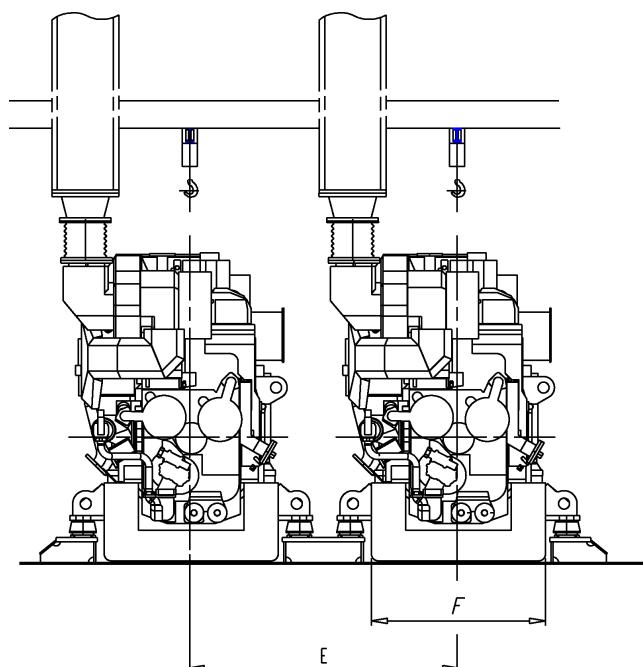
Minimum crankshaft distances, main engine (DAAE006291A)
